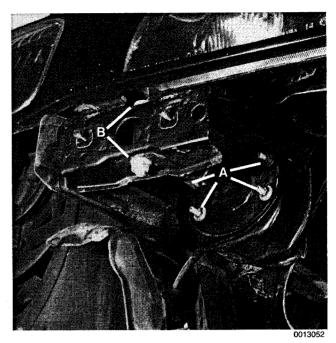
Front bumper impact absorber mounting nuts (A) and bumper bracket hardware (B).
